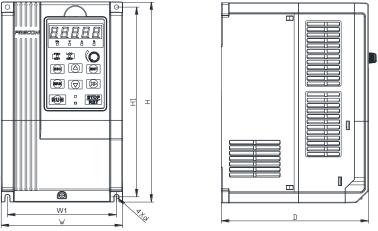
(b) 0.7~2.2kW Wall installation diagram (scheme Two)
